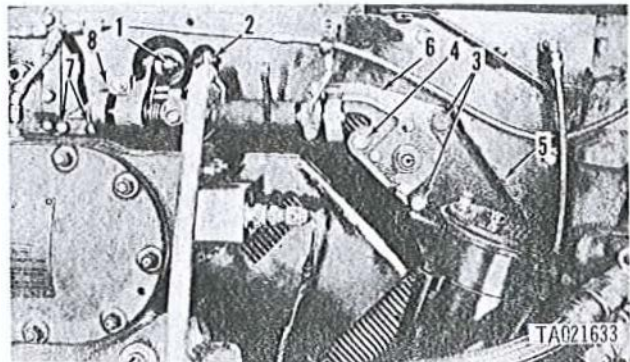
Timing marks on fuel injection pump bearing retaining plate and coupling hub aligned.
